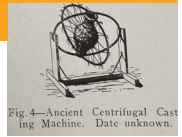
Ancient Centrifugal Casting Machine. Date unknown.
